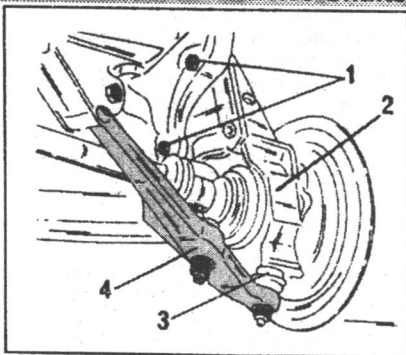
The named parts must be removed when removing the R.H. drive shaft. The numbers are referred to in the text.
